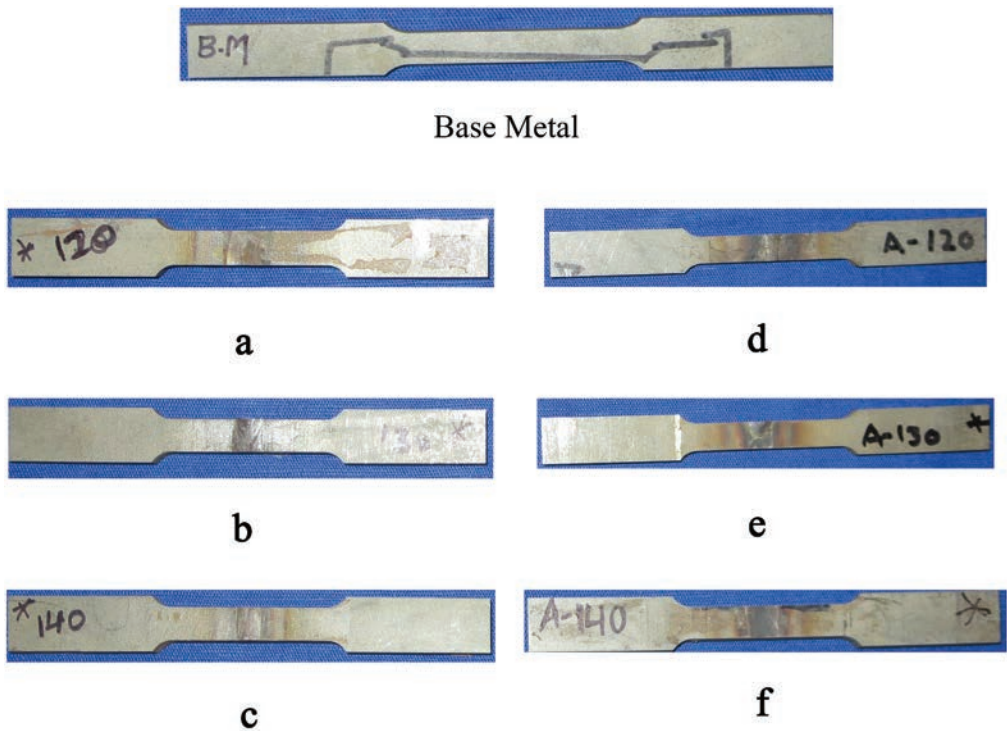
Tensile sample for GTAW (A: 120A weld, B: 130A weld, C: 140A weld) and Autogenous welding (D: 120A weld, E: 130A weld, F: 140A weld).
